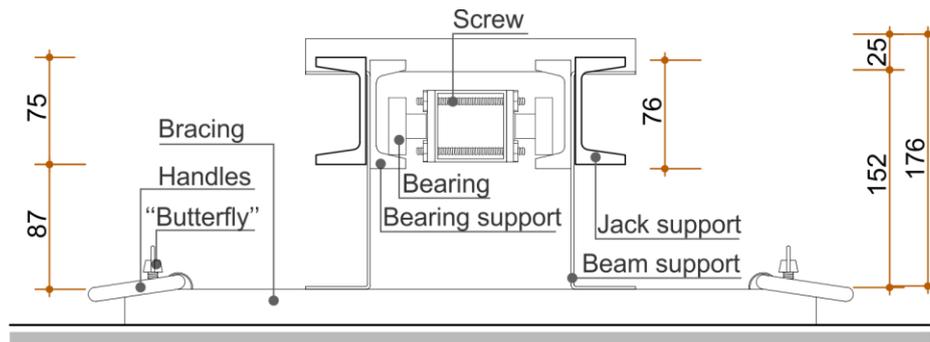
Cross-section of the test bench and details (measurements in “mm”)
